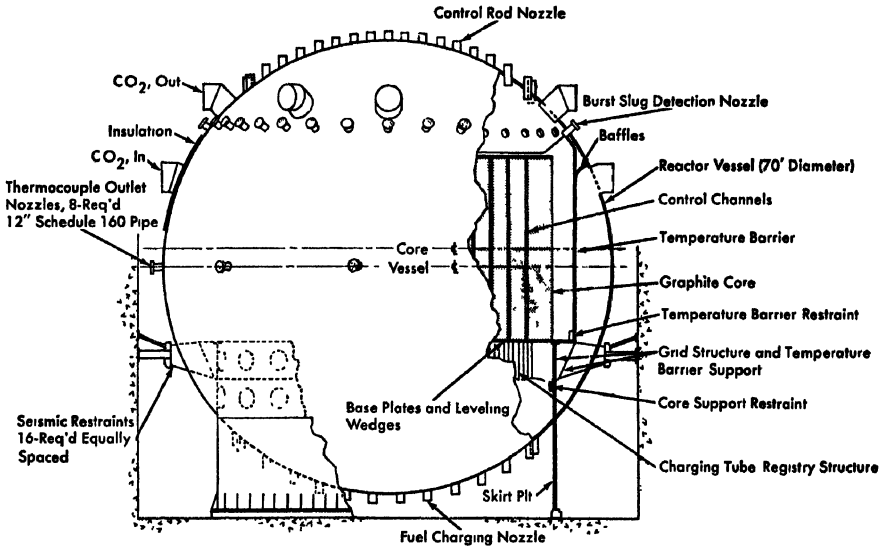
Optimum natural GCPR vessel assembly [12]
